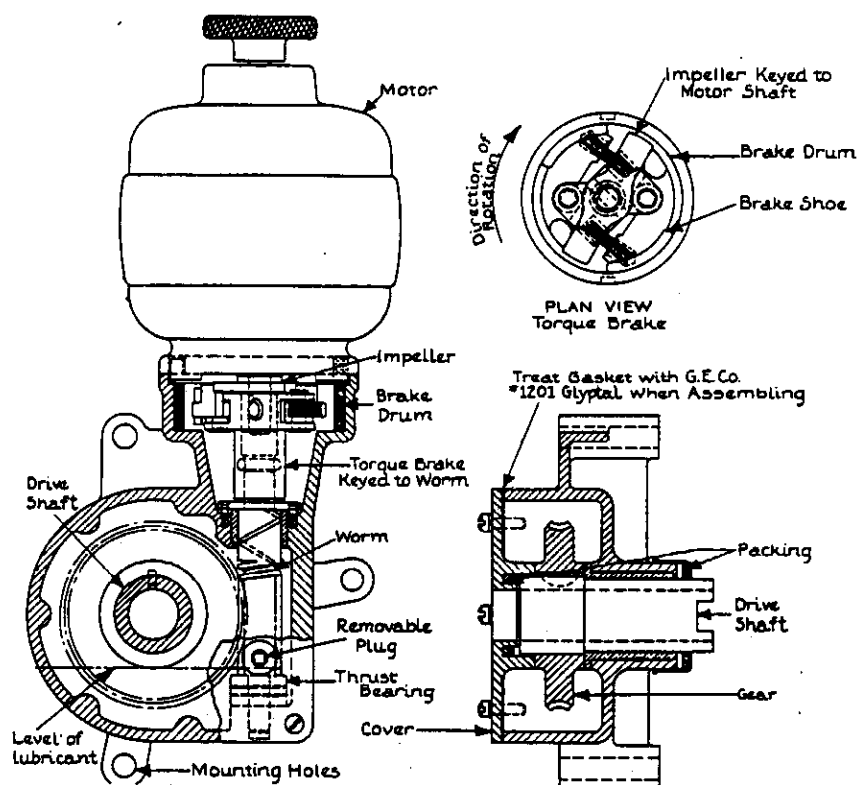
MOTOR, TORQUE BRAKE, AND GEAR REDUCER
